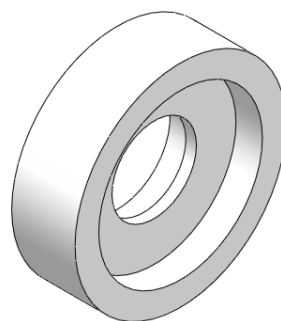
Connector silicone tube and fitting – Solid Works (A.O.P.)
